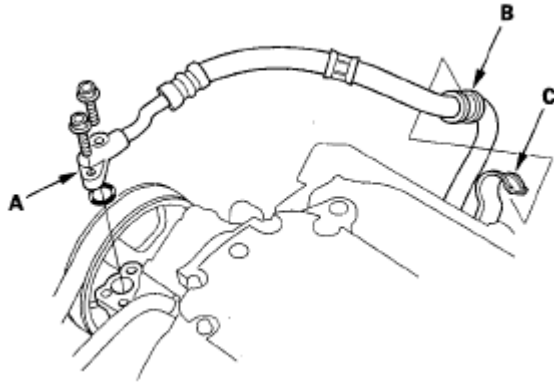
Identifying Power Steering Pump Outlet Line, Hose And Clamp
